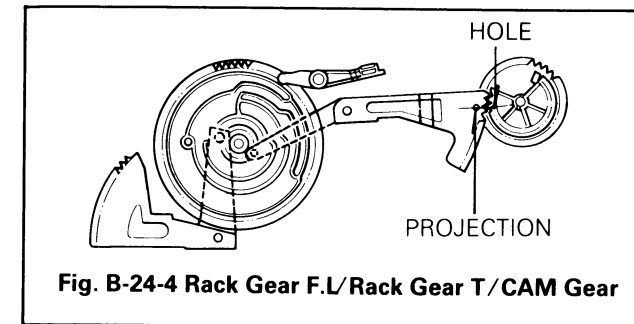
Rack Gear F.L/Rack Gear T/CAM Gear
